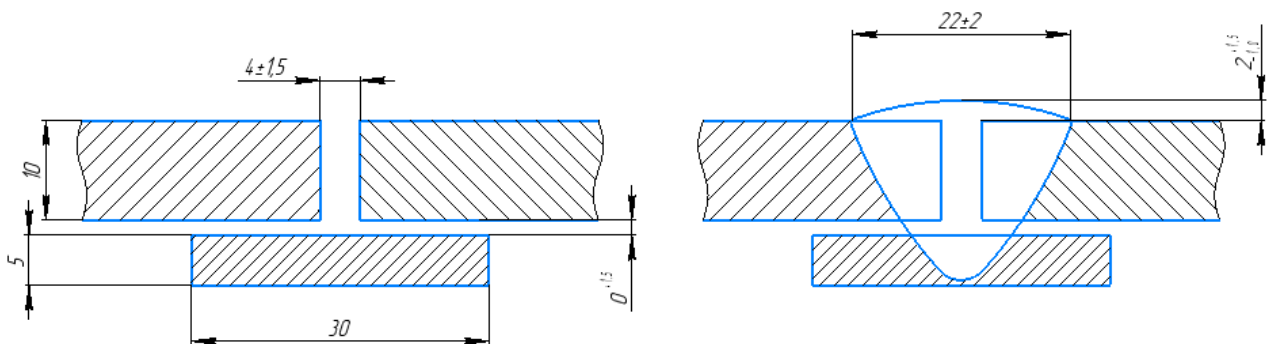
Butt joint without development of edges for welding of ring seams
